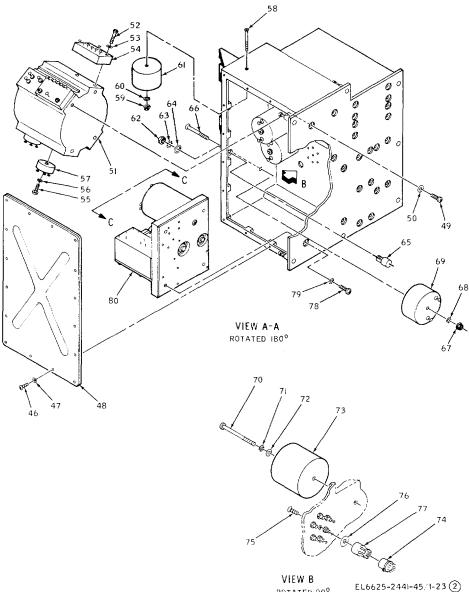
(1). Power Supply 2A IPSI, exploded view (part 1 of 3)
